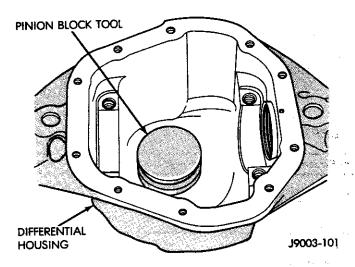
Pinion Block Tool Inserted In Shaft Bore
